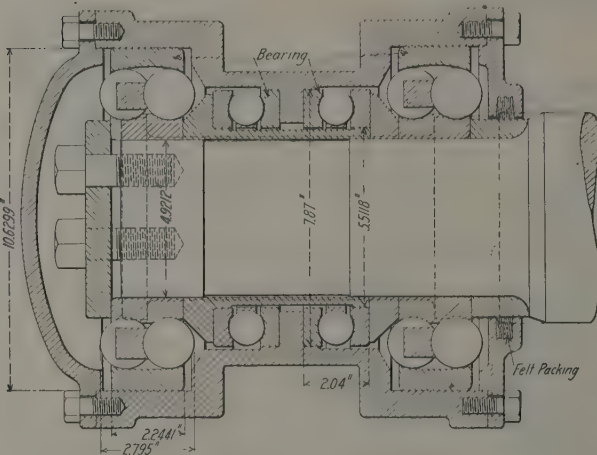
Ball Bearing for New York, New Haven & Hartford 5 in. by 9 in. Journal. S. K. F. Ball Bearing Company.
